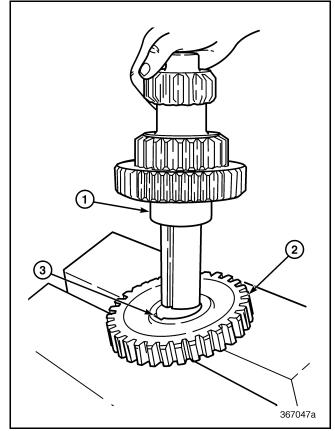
Aligning Keyway with Second (Sixth) Gear
